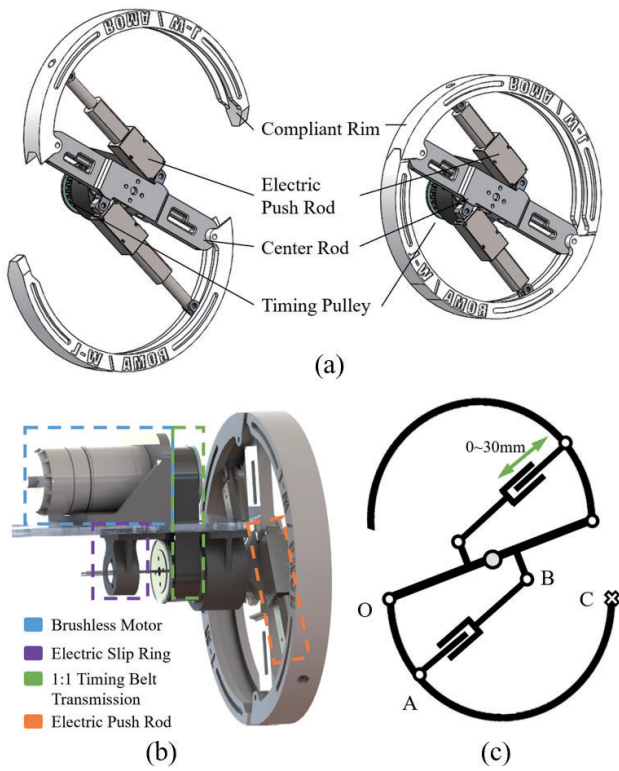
Mechanical Design of the wheel-leg transformable module. (a) The mechanical structure of the wheel-leg transformable mechanism. (b) The composition of the wheel-leg module. (c) Schematic diagram of the module.
